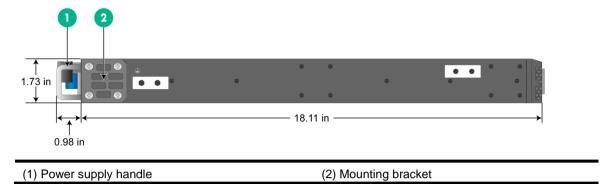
HPE 5944 48XGT 6QS28 chassis dimensions with the mounting brackets installed at the power supply side
